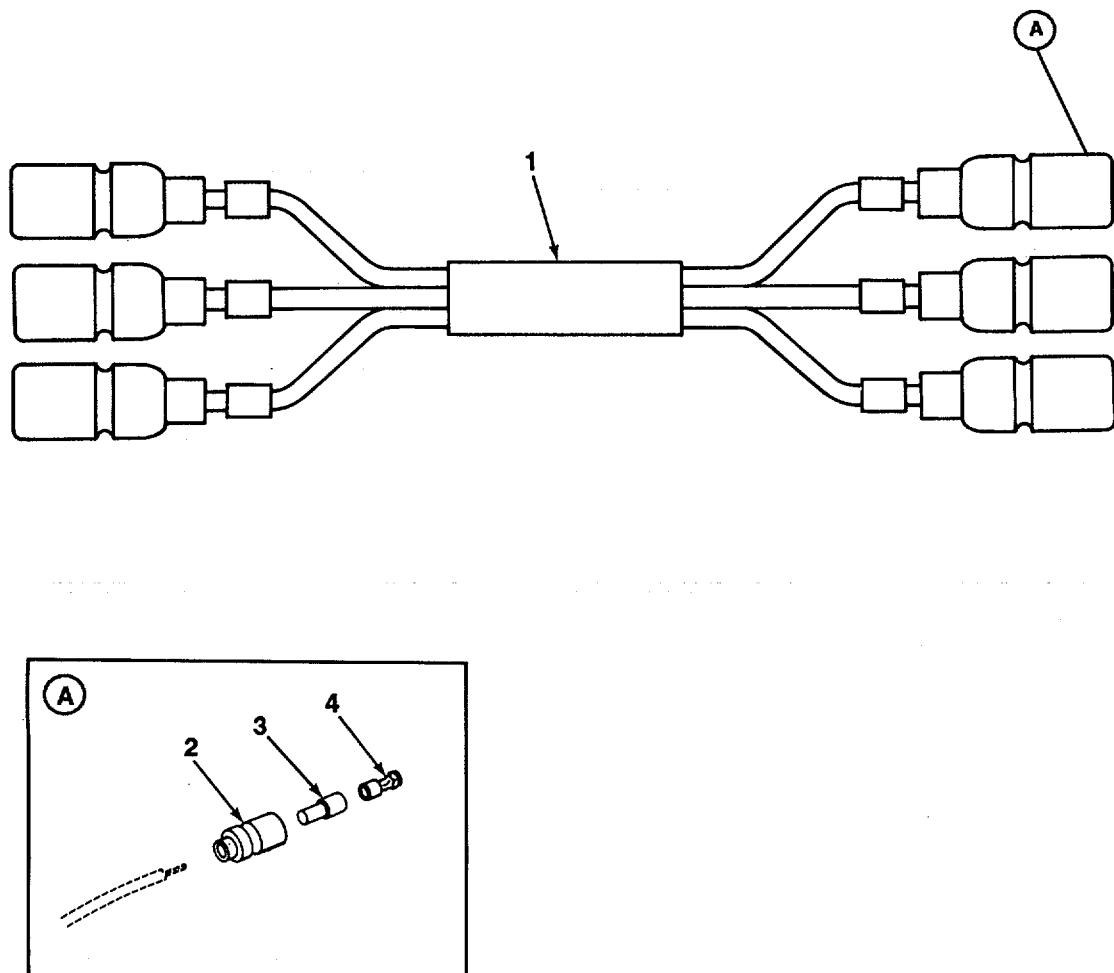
CONTROL PANEL CABLE ASSEMBLY.
